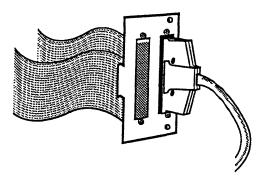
UNIBUS Adapter Plate and Connector Assembly
